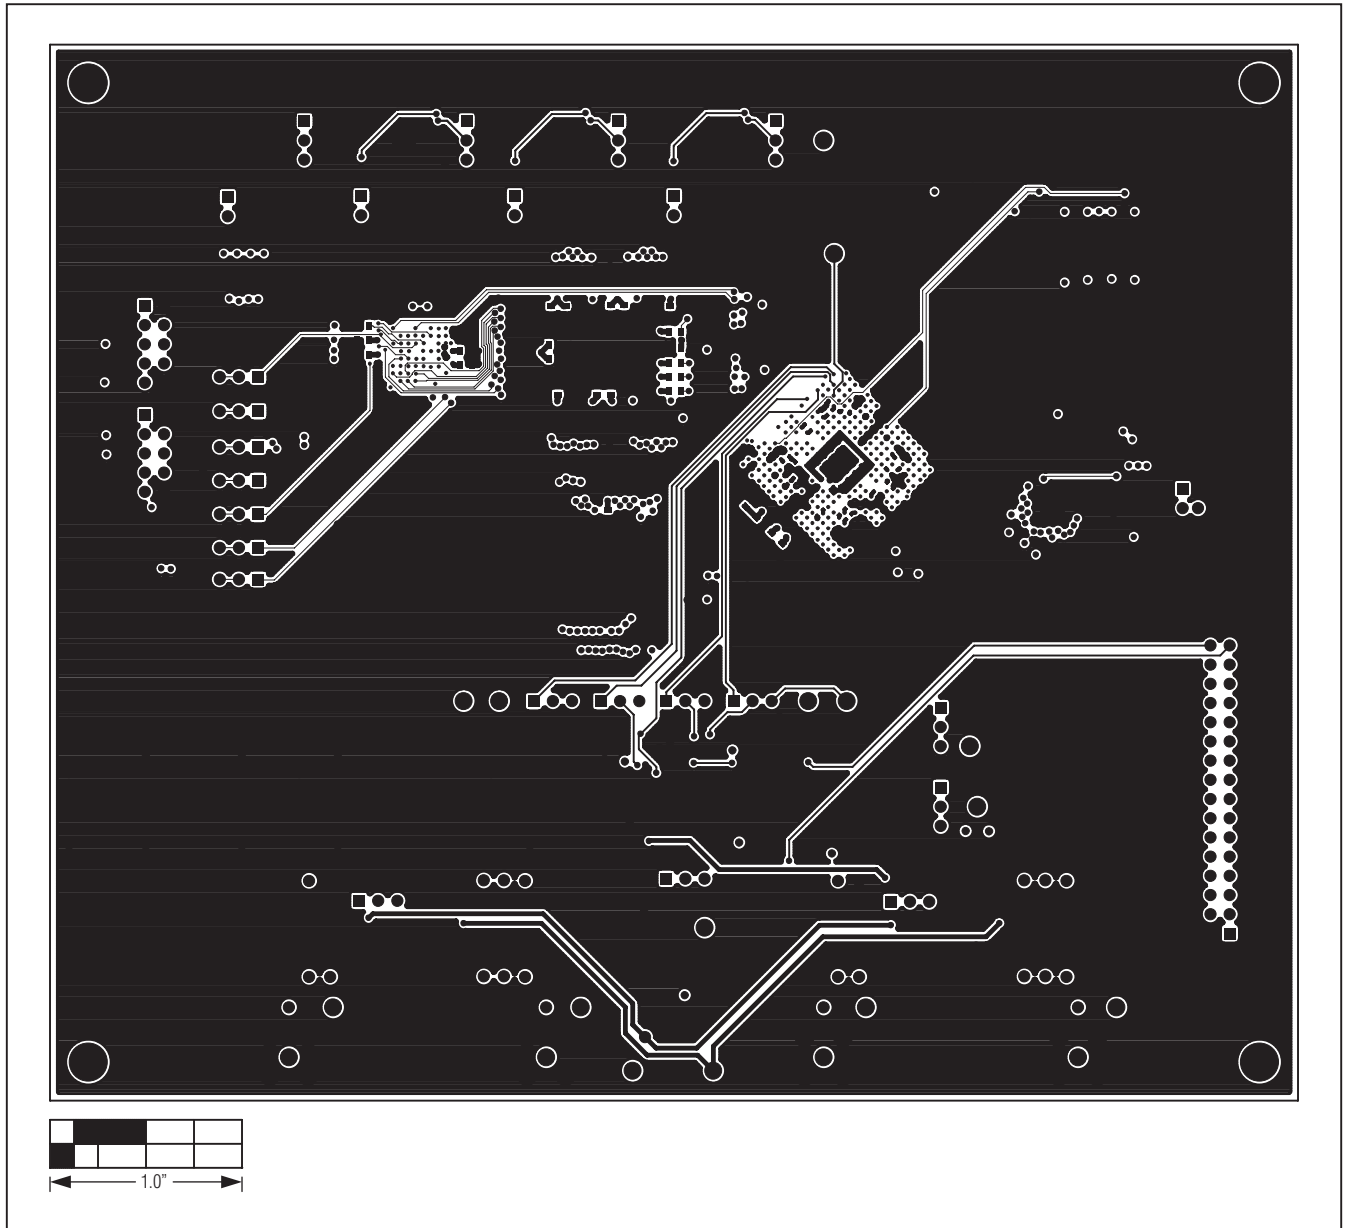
MAX11666 EV Kit PCB Layout— Bottom Side
